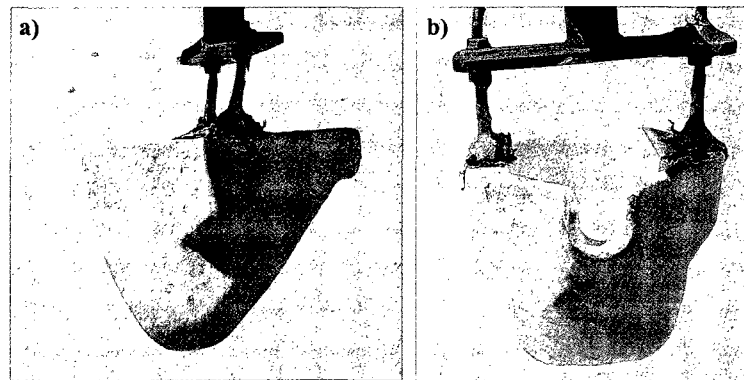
3.5lb capacity ceramic ladle used to pour test bar castings, a) side view, b) front view.
